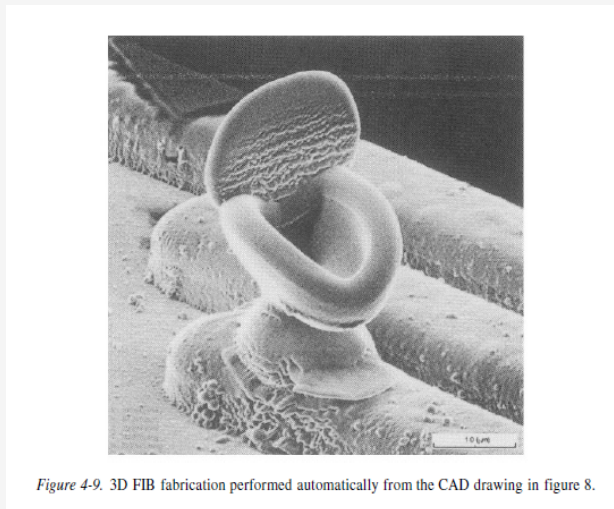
3D FIB fabrication performed automatically from the CAD drawing in figure 8.
